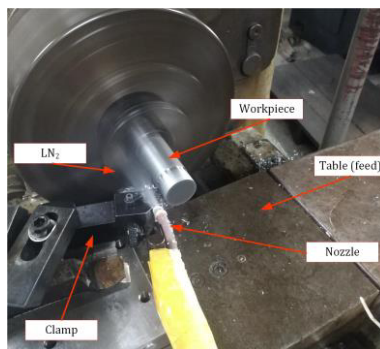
Cryogenic machining of AISI-L6 Tool Steel
